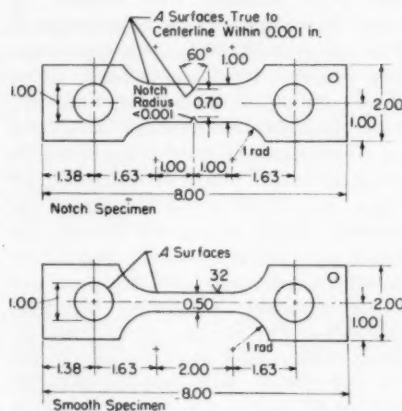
Smooth and Sharp-Edge-Notch Sheet Tensile Specimens.
